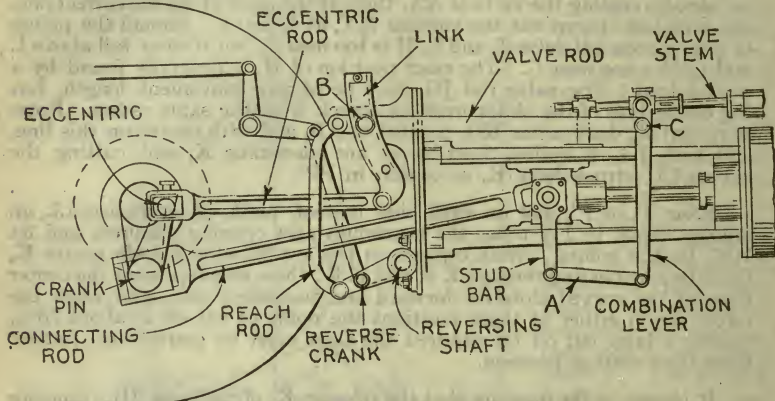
Walschaerts valve gear as applied to a locomotive.
